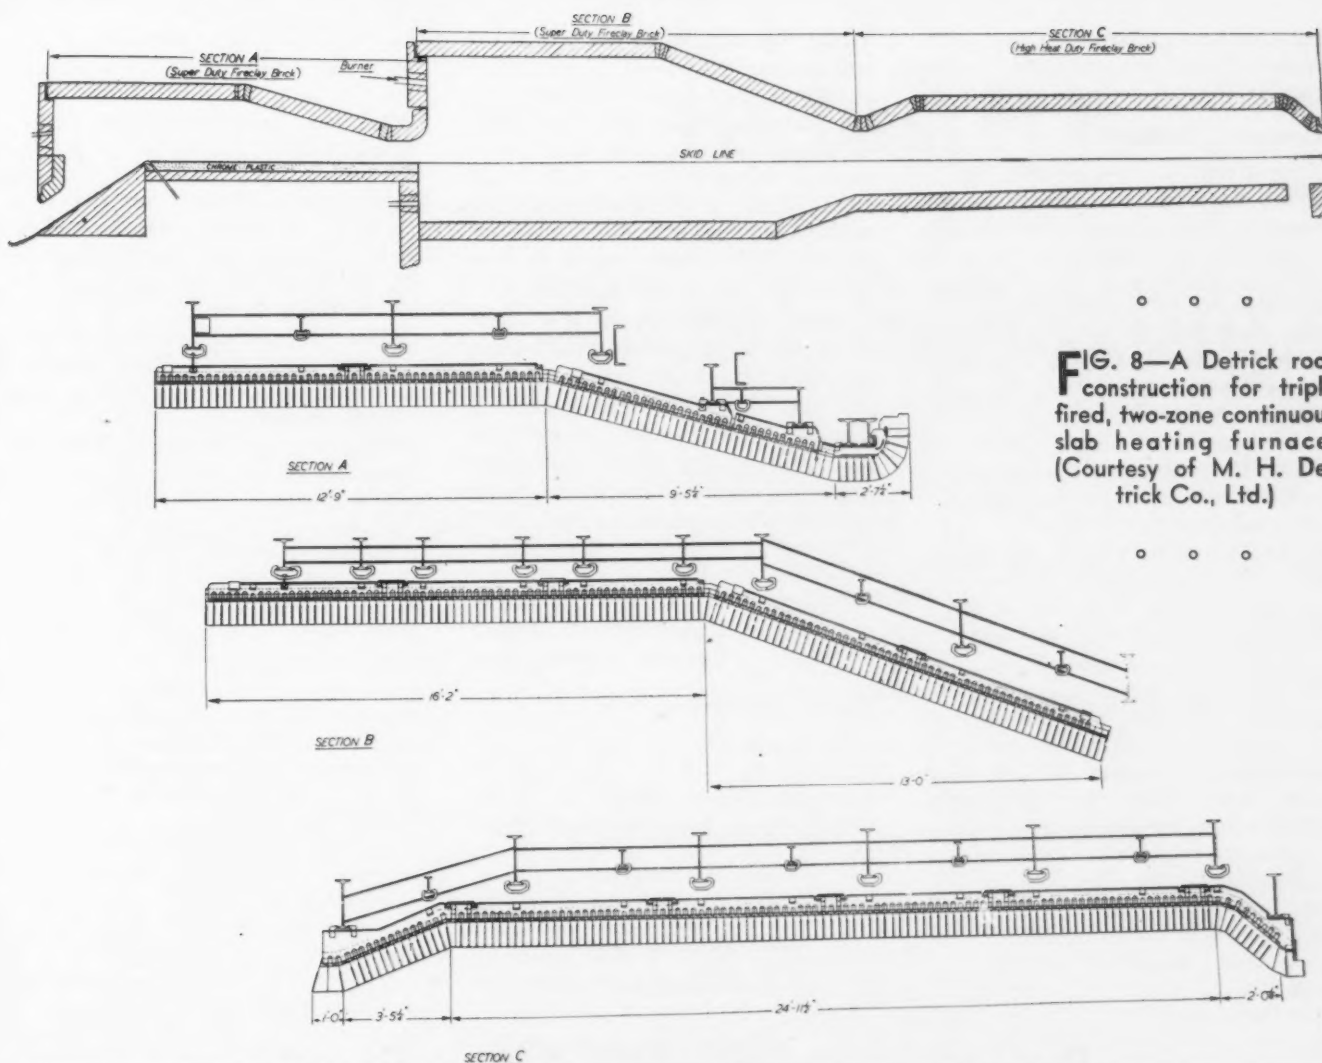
A Detrick roof construction for triple fired, two-zone continuous slab heating furnace. (Courtesy of M. H. Detrick Co., Ltd.)
